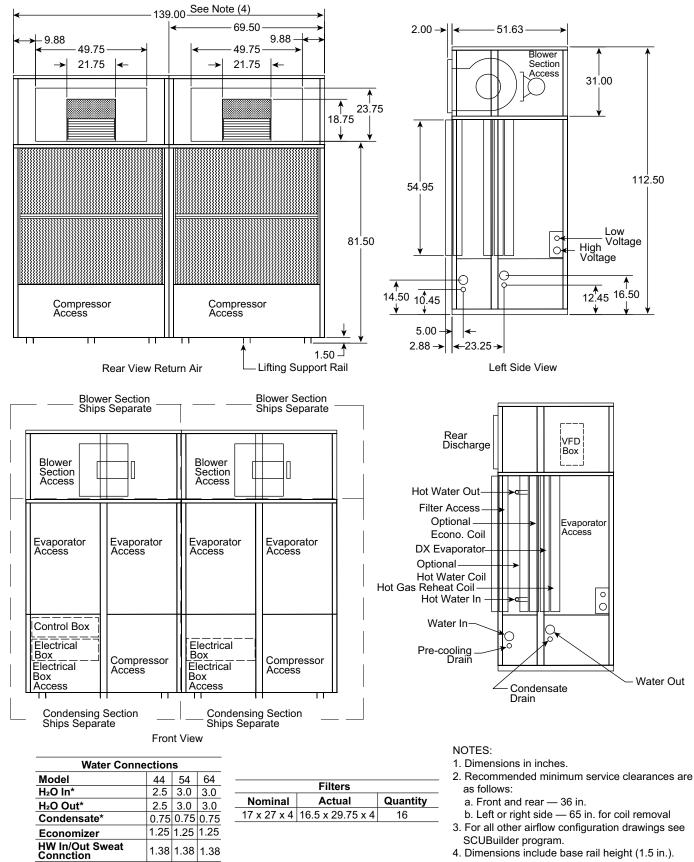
50BVT,W,V034 (Low Boy) Dimensions Rear Return, Top Supply Drawing with Waterside Economizer
